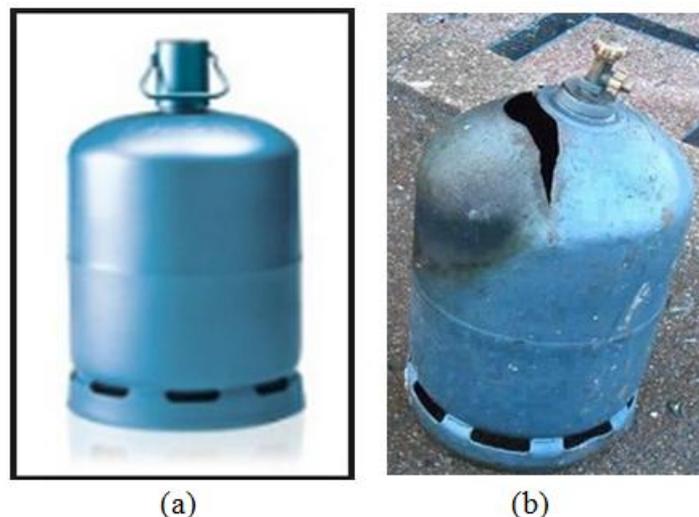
(a) Photo of a 12kg gas bottle (b) Example of an exploded 12kg gas bottle
